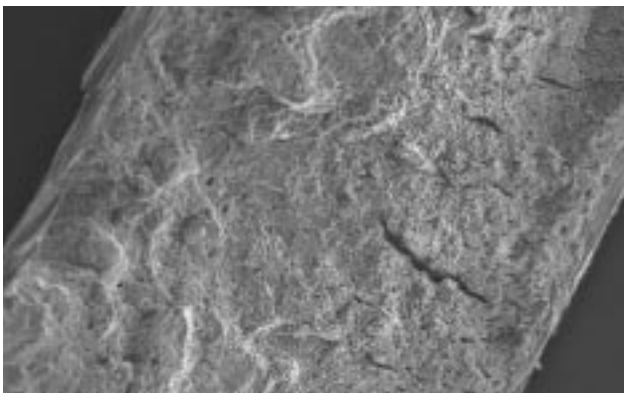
View of Fracture Surface Showing Solidification Fissures (6013 with 4047 Filler Wire)
